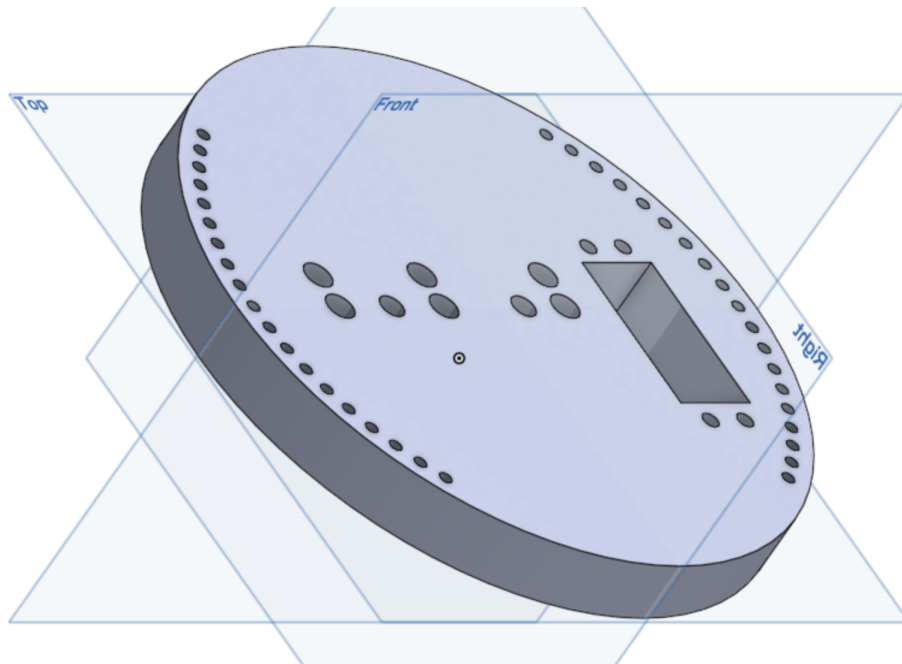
Fixture on the right hand side of the wind tunnel
